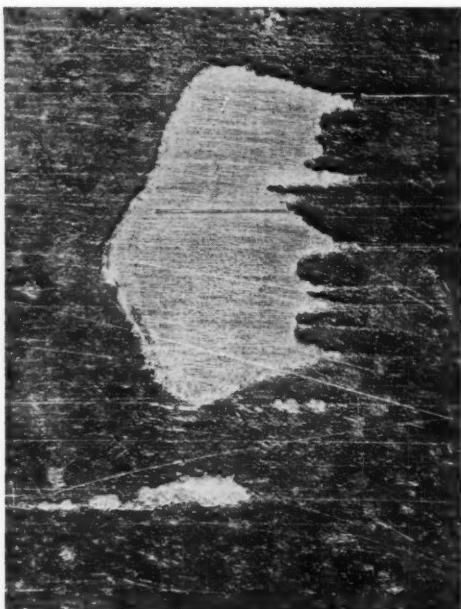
Surface of aircraft master rod bearing in which the superficial lead layer was eroded away by hydraulic action of circulating solids in the lubricant. Magnification 5X.
